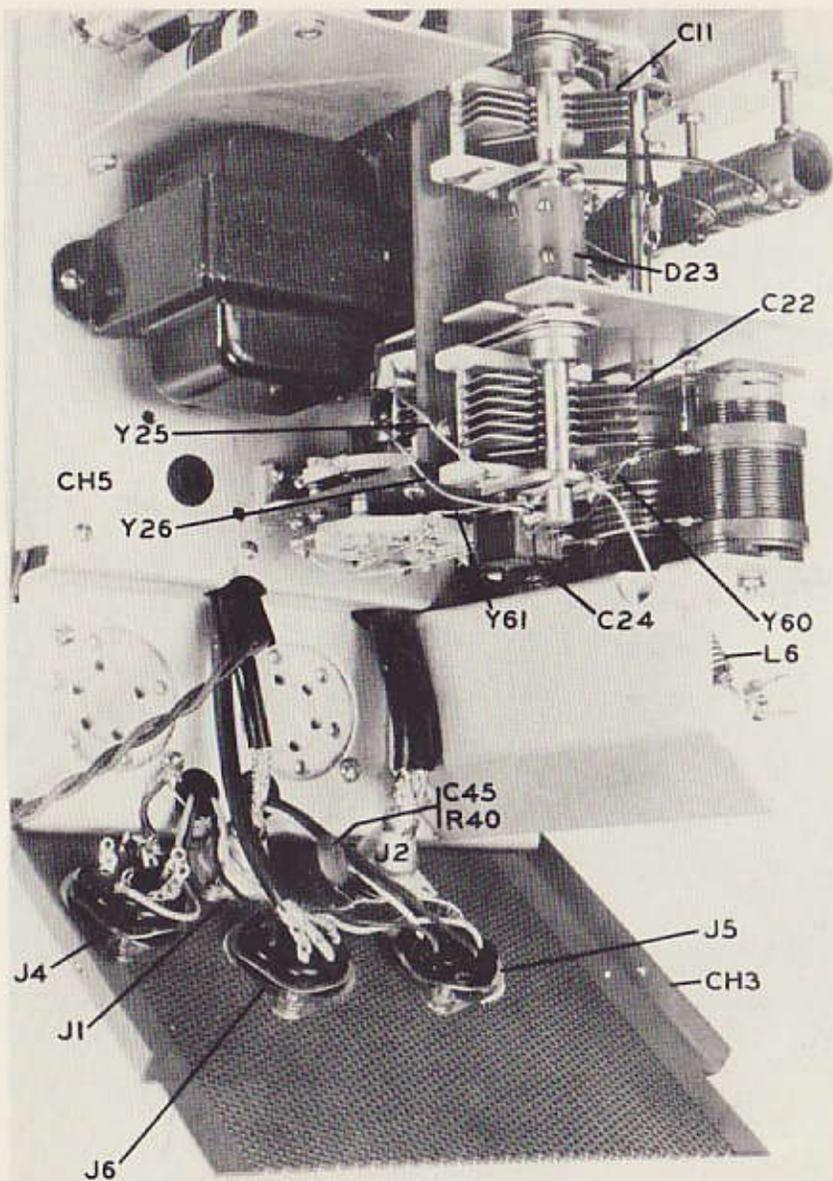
A FINAL STAGE AND COAX ASSEMBLY
